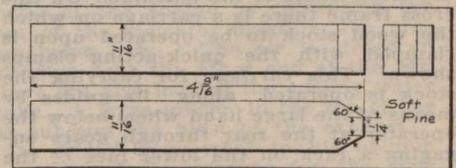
Tie Plug from Tie Plug Forming Machine.
